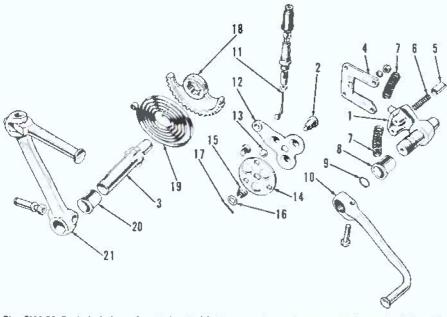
Exploded view of parts located in the gear box outer cover. Refer to Fig. TM4-29 for assembled view.
